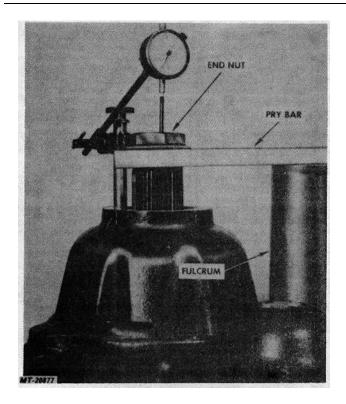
Measuring Input Shaft Fore & Aft Movement Establish Inter-Axle Differential Bearing End Play
